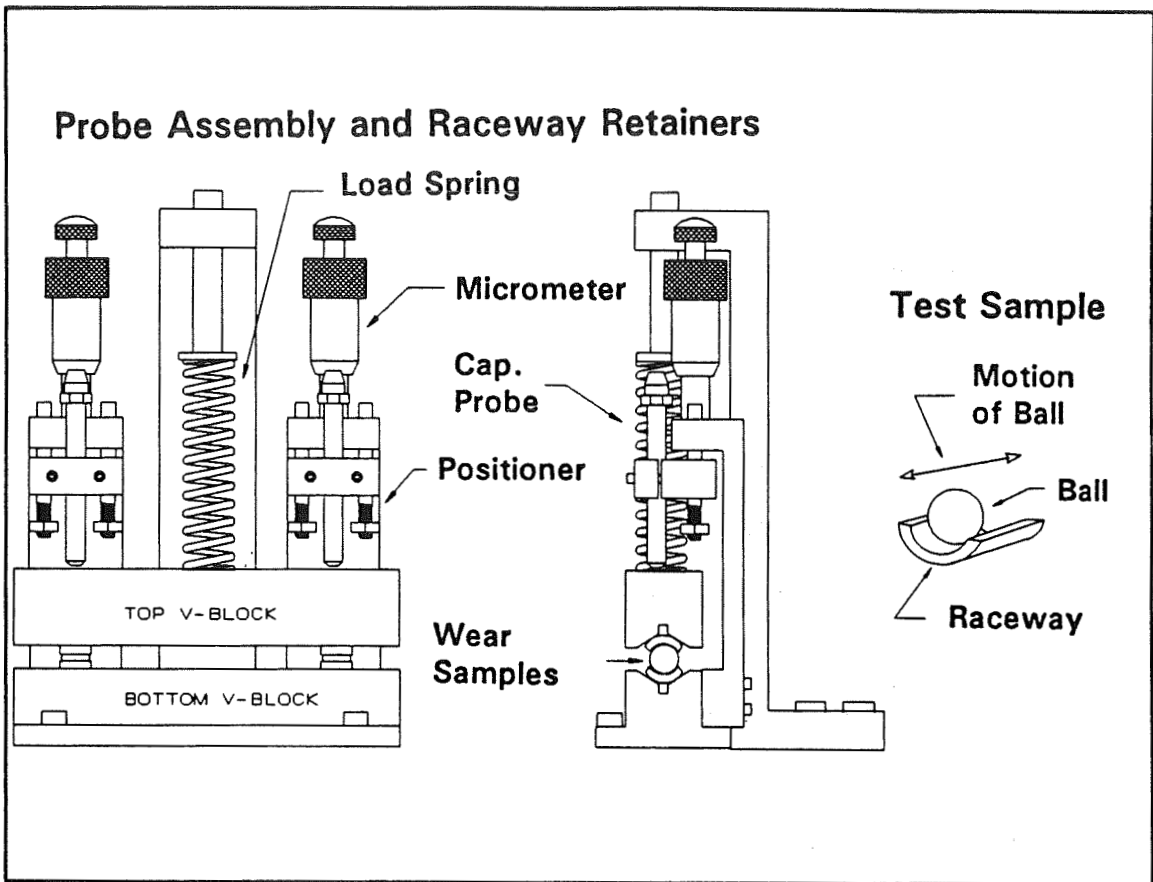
Boundary Lubrication Test Fixture, Bearing and Sensor Assembly
